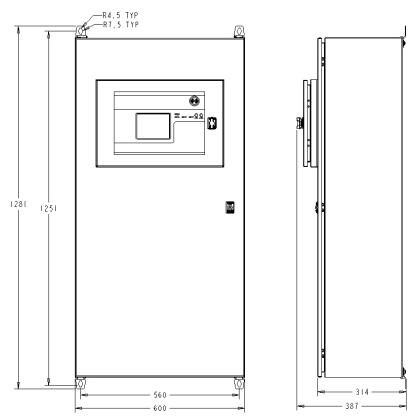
Touchpoint Pro Large Wall Mounted Enclosure - Mild Steel
